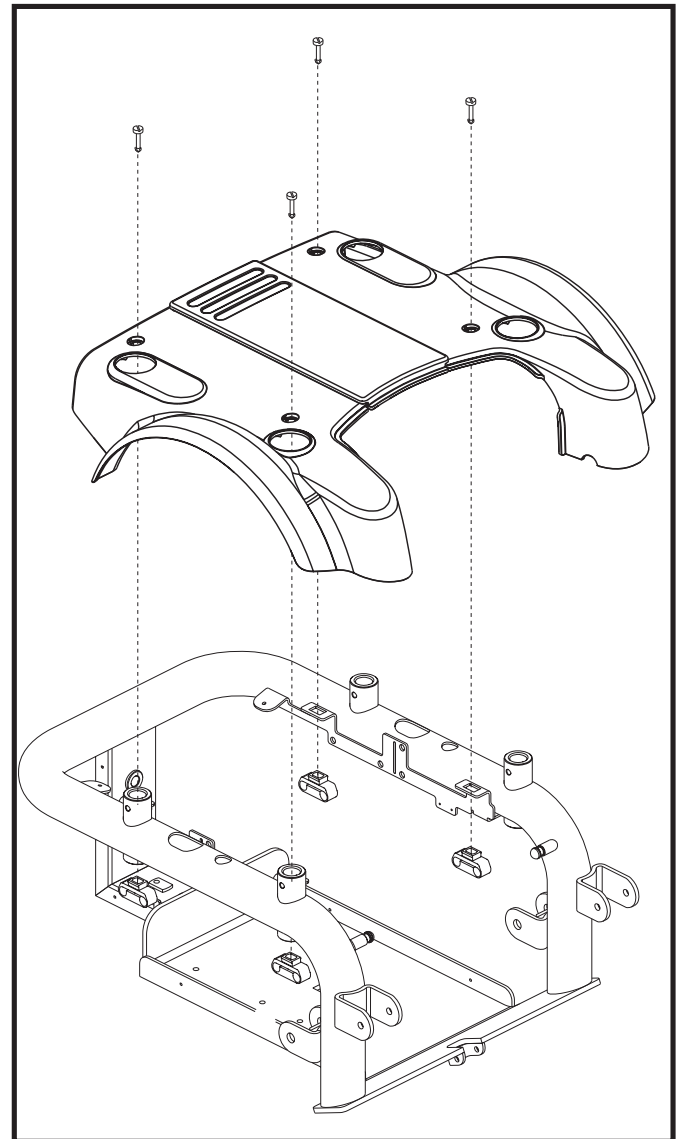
Jazzy 1121 Shroud Removal/Assembly
